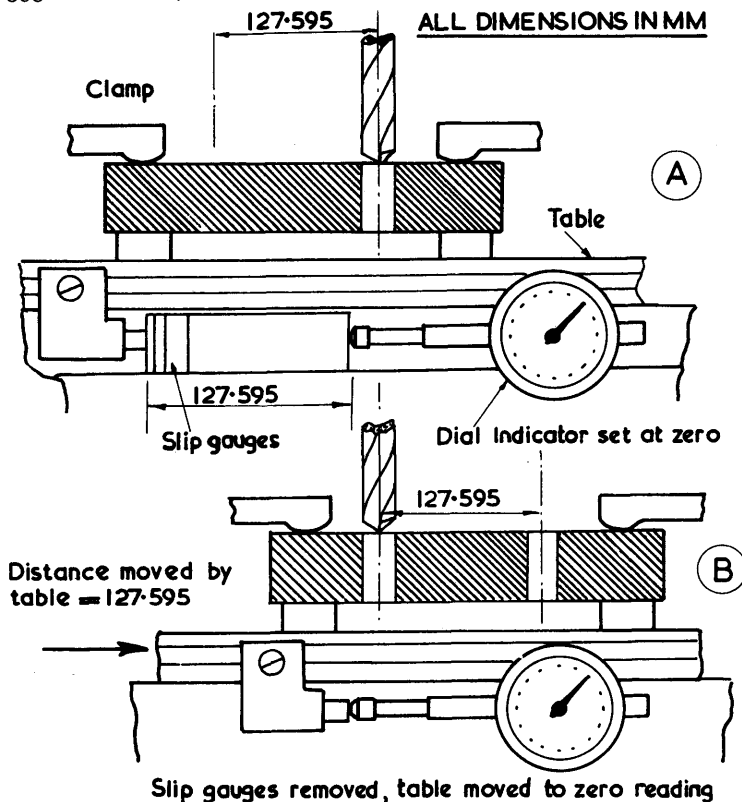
Control of Linear Table Movement when Jig Boring using Slip Gauges and Dial Indicator.
